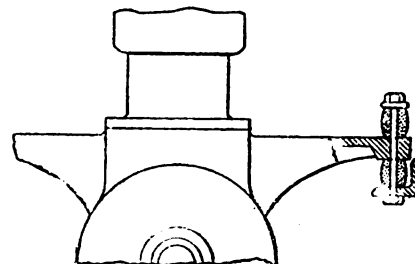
Method of attaching Motor to an Angle Frame by Rubber Buffers.
